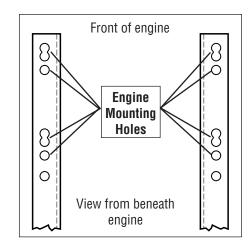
If left and right side engine support brackets have multiple holes, be sure to note which holes are used to mount the engine. Use the same holes when installing the engine mounting screws.
